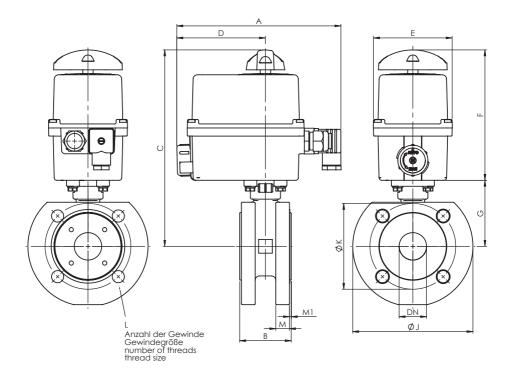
Dimensional drawing Type EKW (exemplary representation with ER Plus rotary actuator)
